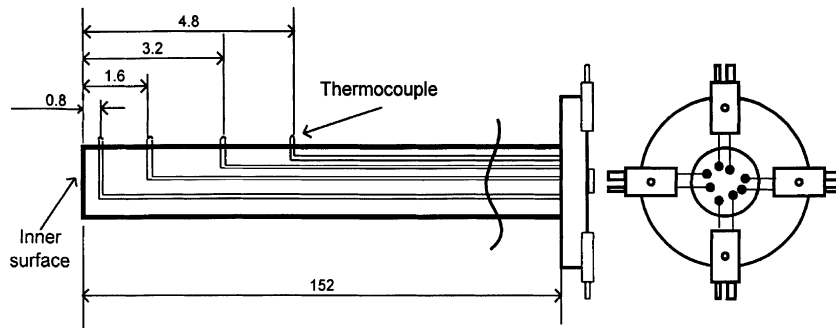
Set-up for water temperature measurements. All dimensions in millimeters.
